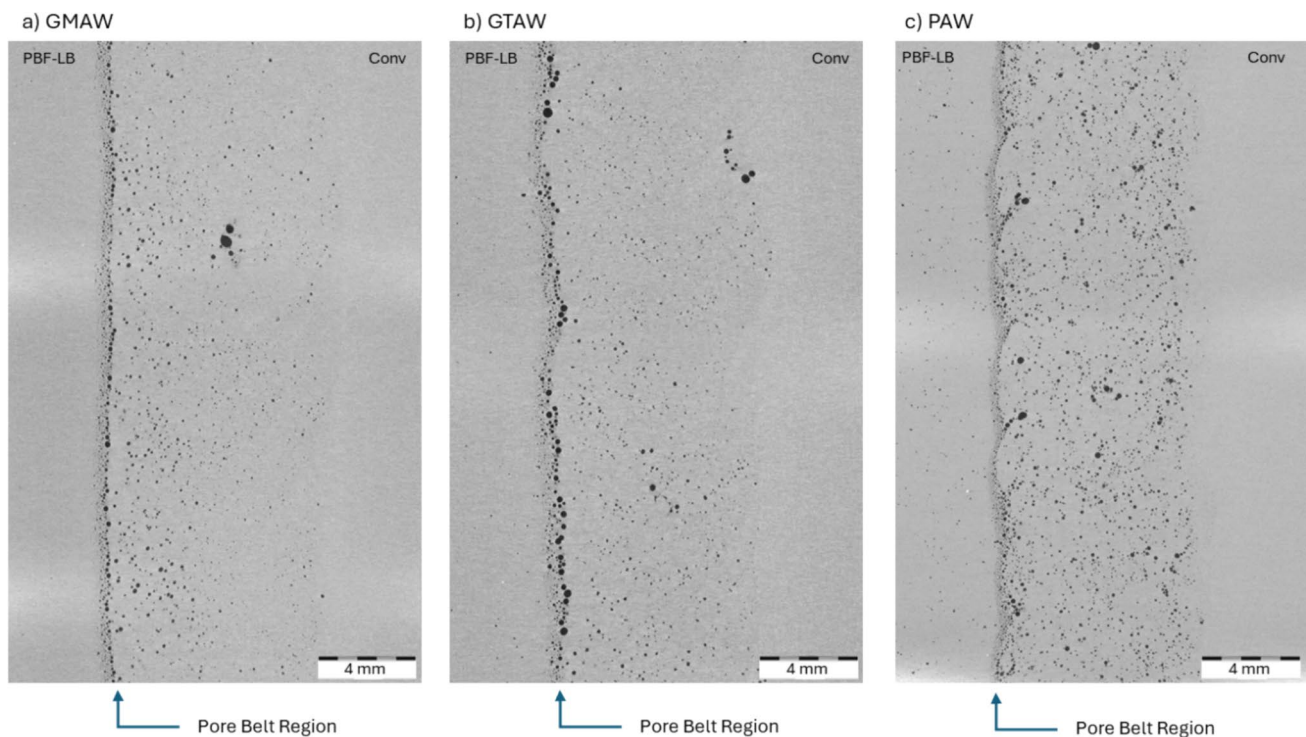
Computed tomography of the top view of GMAW, GTAW, and PAW welds performed between conventionally manufactured EN AW-5083, and PBF-LB manufactured AlSi10Mg Al alloys, highlighting the presence of a continuous pore belt region in the length of the weld
